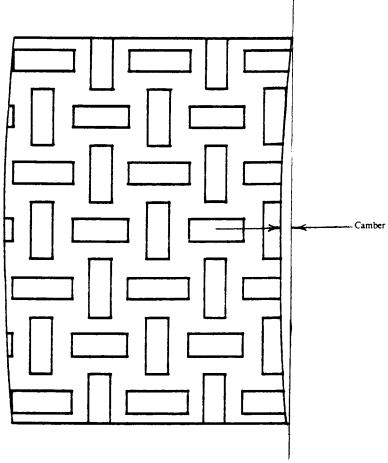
Camber for Rectangular Sheared Floor Plates and Gas-Cut Floor Plates (see Table 5 or Table A1.4)
